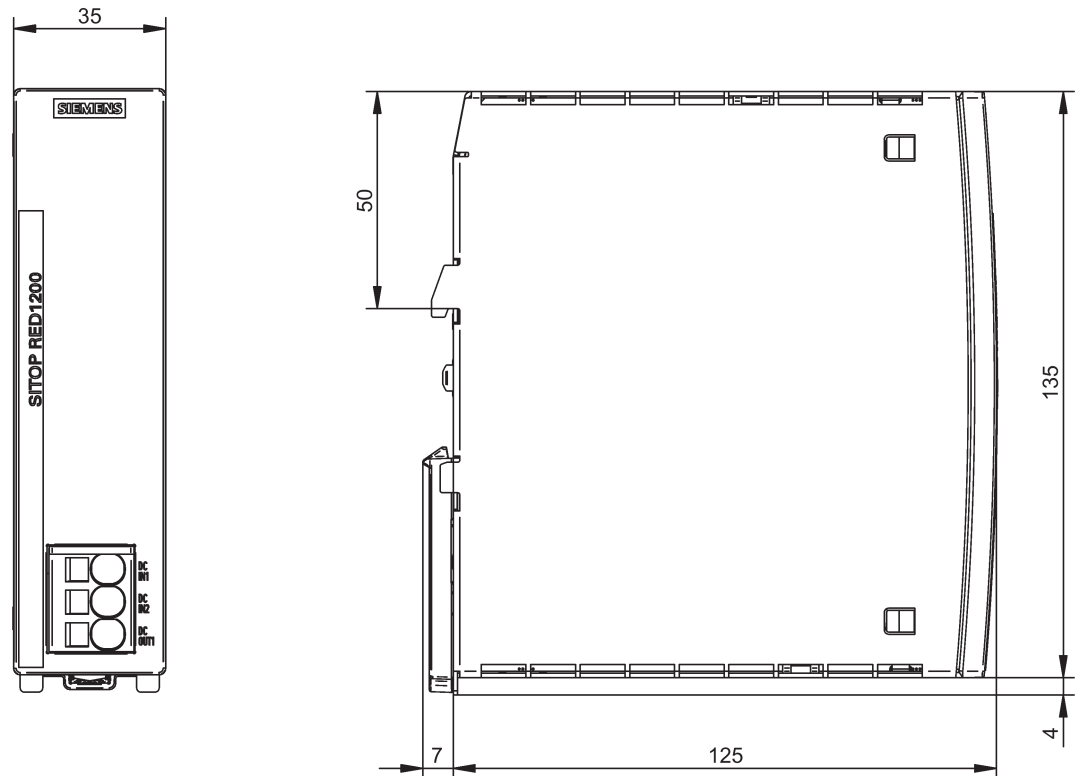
Dimension drawing 6EP4346-7RB00-0AX0
